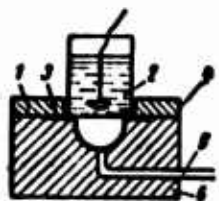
Stamping by explosion of concentrated EM: 1 - blank; 2 - water; 3 - detail; 4 - clamp; 5 - vacuum channel; 6 - die.
